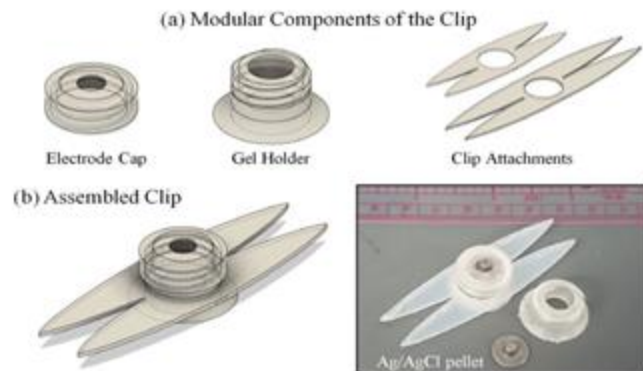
Components of the Sevo electrode prototype. (a) CAD drawings of the modular components of the electrode and (b) CAD drawing of the assembled clip shown alongside a photograph of the 3D printed prototype
